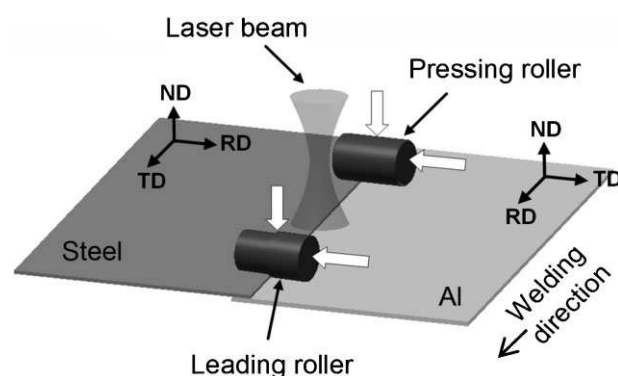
Schematic illustration of the welding configuration and spatial arrangement of Al and steel plates: RD, rolling direction; TD, transverse direction; ND, normal direction.
